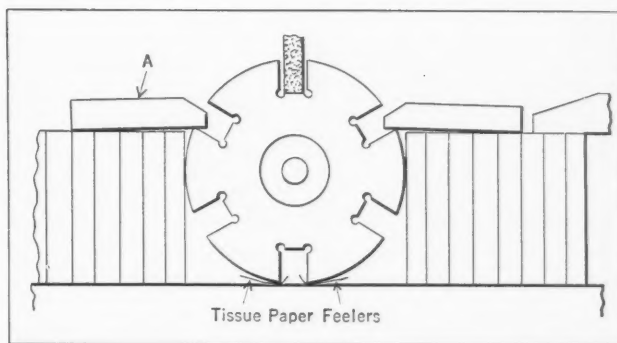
Set-up for Grinding the Bottom of the Slots. Magnetic Parallels Aid in Holding the Gage Securely
